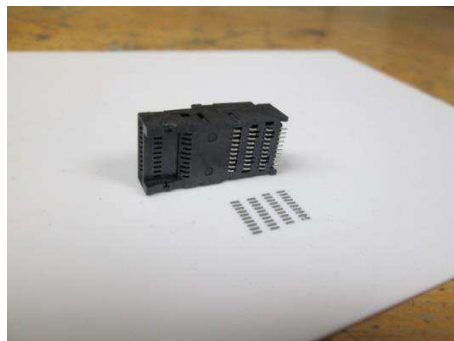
Solderability Test Setup – Test Specimen and Solder Paste
